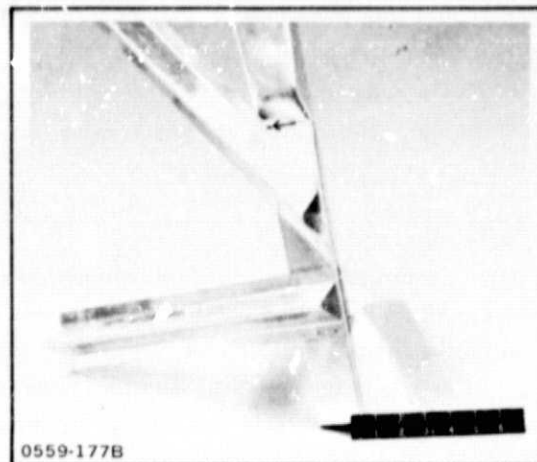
Six Weld/Joint Test Specimen
